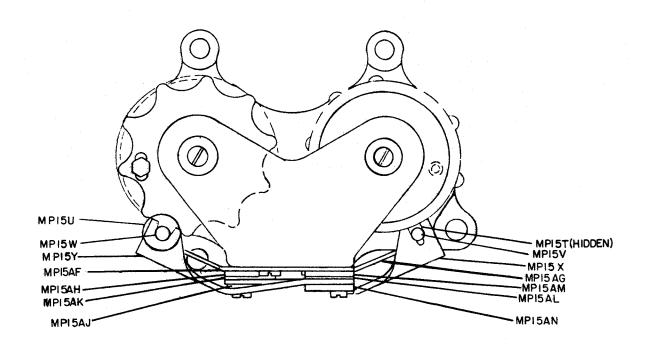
Dual-Sprocket Assembly A2MP15, Component Locations
